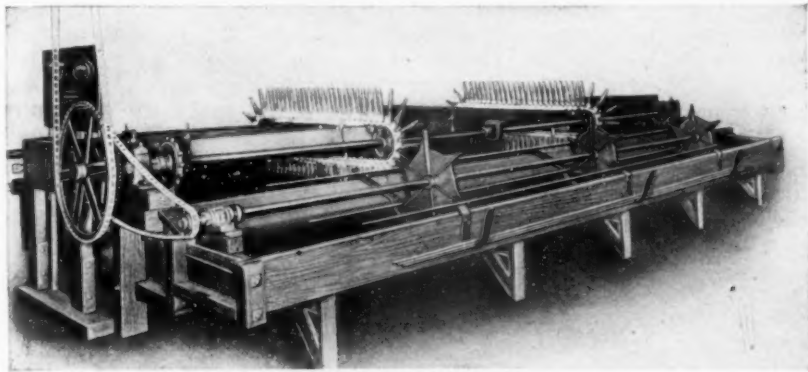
MACHINE FOR GALVANIZING TUBES AND BAR IRON.
